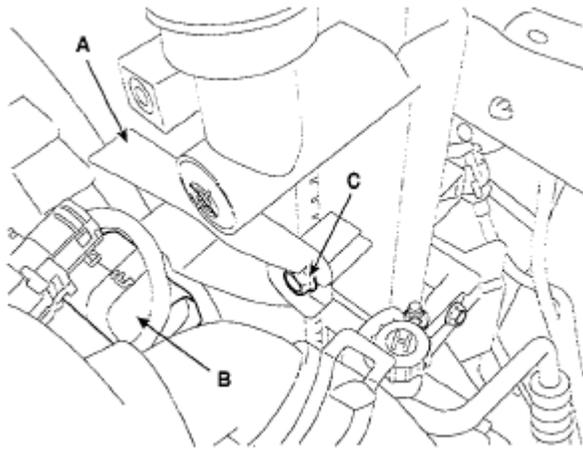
Identifying Radiator Upper Hose And Lower Hose
